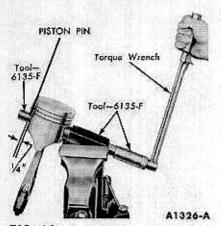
Checking Interference Torque Required to Seal Piston Pin
